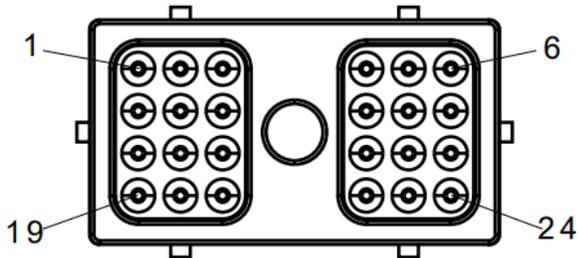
Robot Side 24-Pin Connector Pin-Outs
